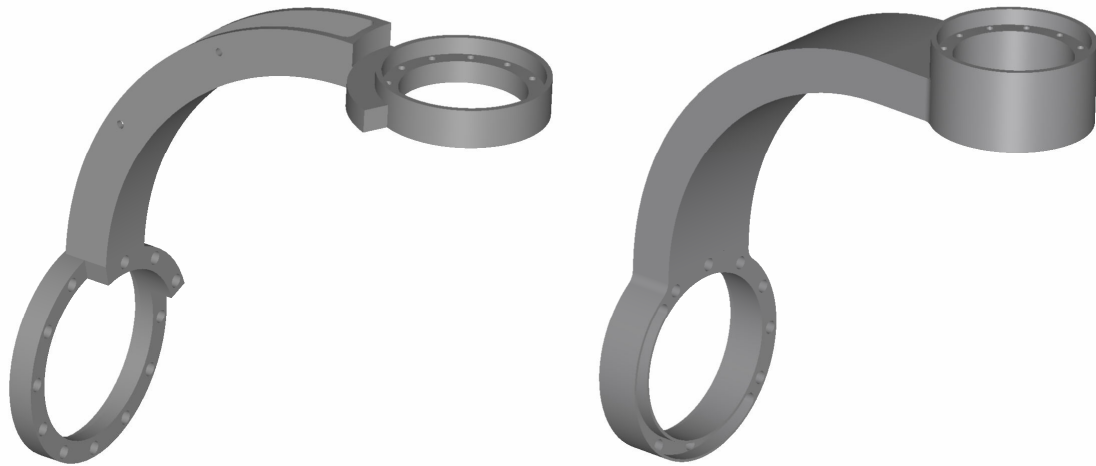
Original shoulder link design (left) and modified shoulder link design (right), which connects the first shoulder joint with the second shoulder joint
